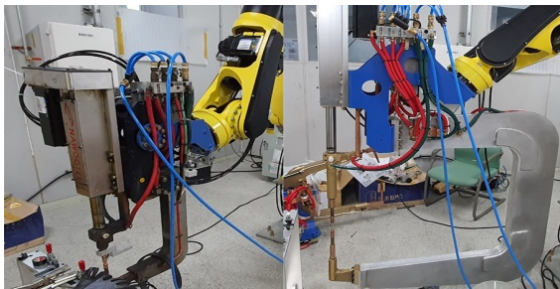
Mid-size and large-size servo C-gun for resistance spot welding
